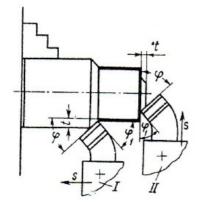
Types of tuning tools and shapes of machined surfaces
